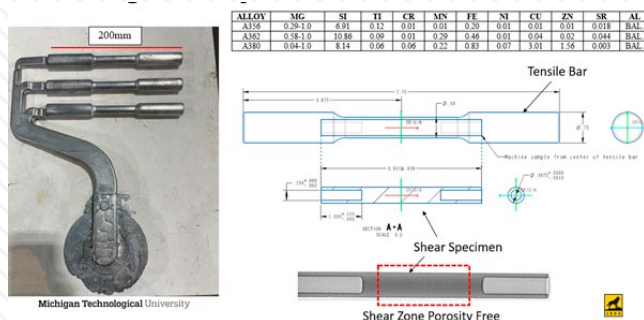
Shear specimens being made from die cast tensile bar center sections.
